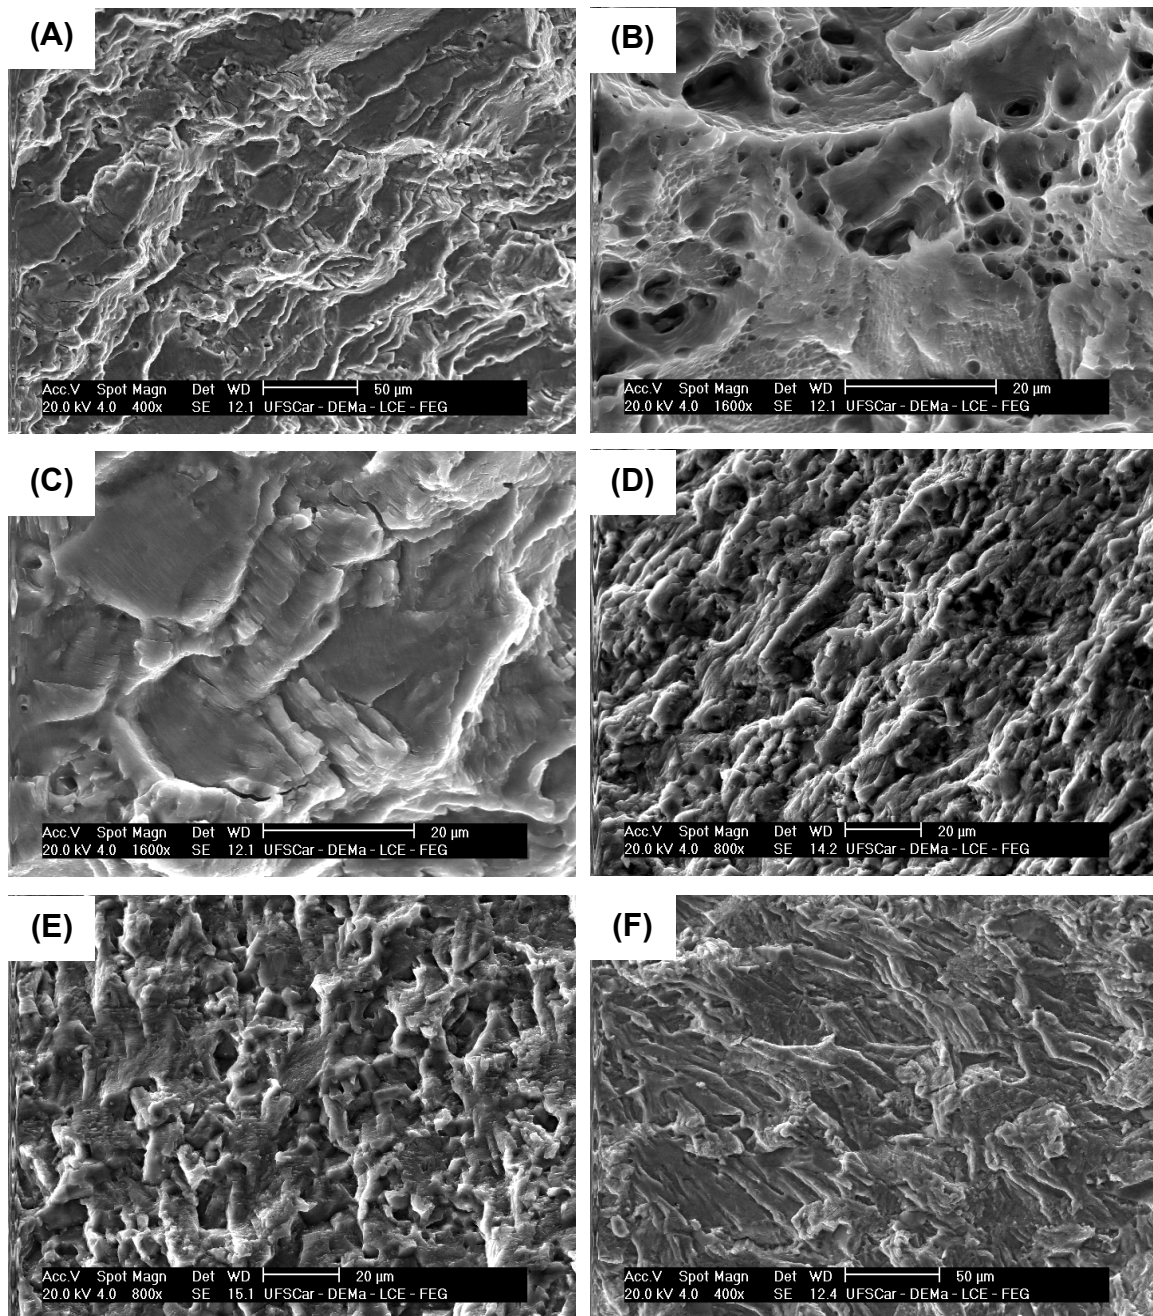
Fracture surface investigation of the eyebrow failure mode for high-cycle loading condition: (A) and (B) dimples indicating ductile fracture in the final fracture area; (C) fatigue striations in the center area; (D) and (E) fatigue striations in the transition region between the weld periphery and the plate width, and (F) fatigue striations in the base material.
